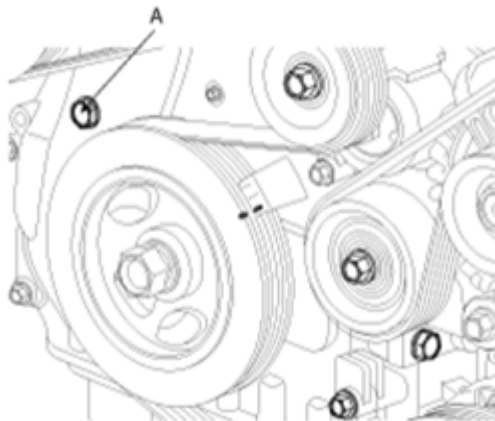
Identifying Service Hole Bolt Of Timing Chain Cover
